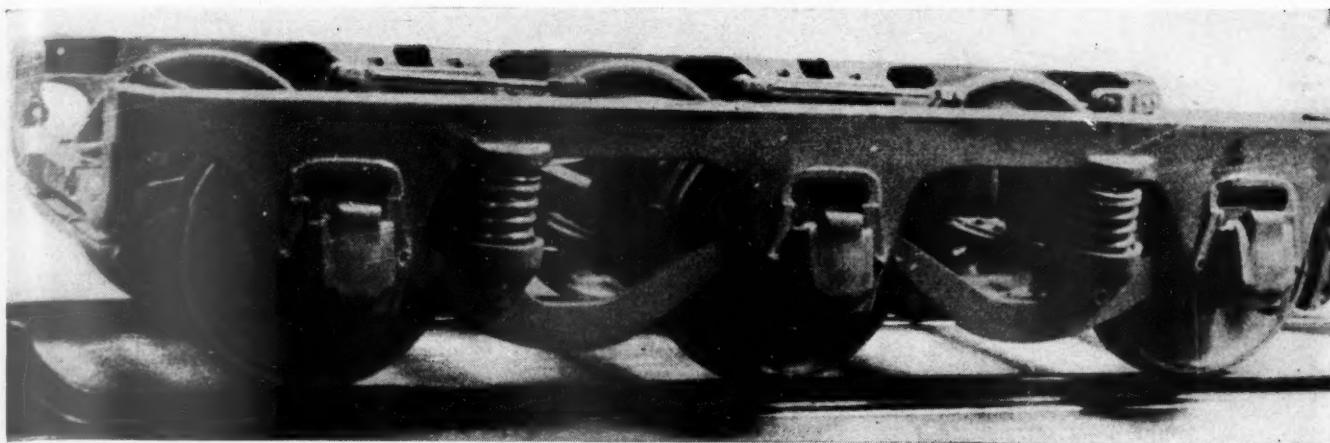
Truck with equalizer bars and springs in place—Center form and bolster springs removed
